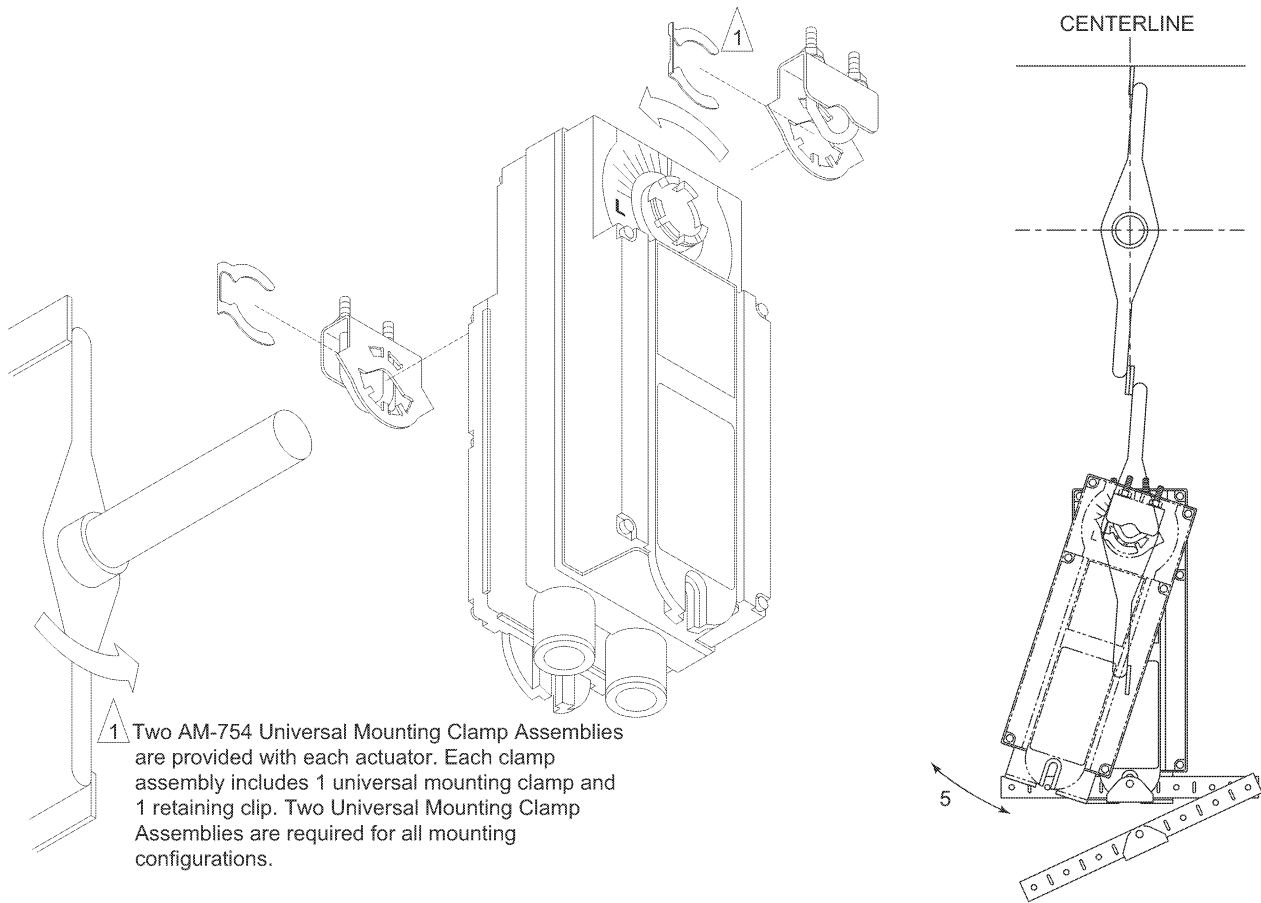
Long Damper Shaft Installation and Actuator Parts Identification.
